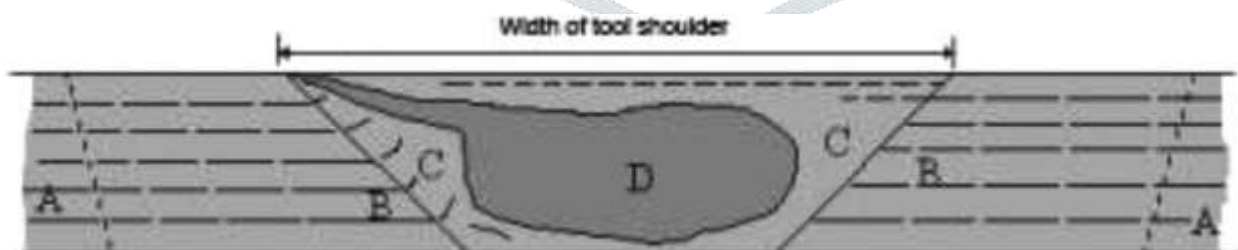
Cross-section of Friction Stir welded material (Mubiaya and Akinlabi, 2013).
